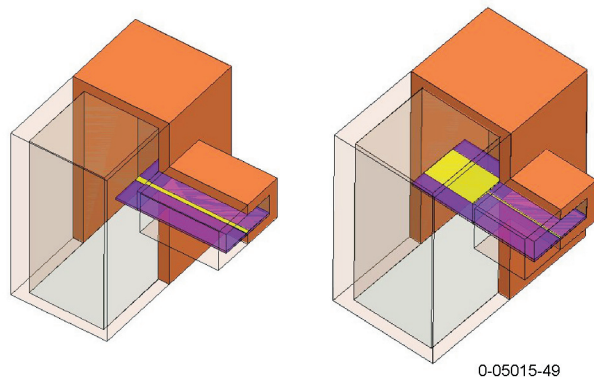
Cutaway of transition assembly, side view (upper) and top view (lower).
